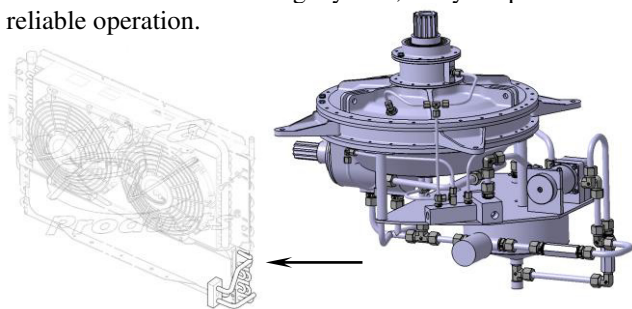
Additional design structure applied for lubrication and cooling which provides gear unit operation in aircraft field
